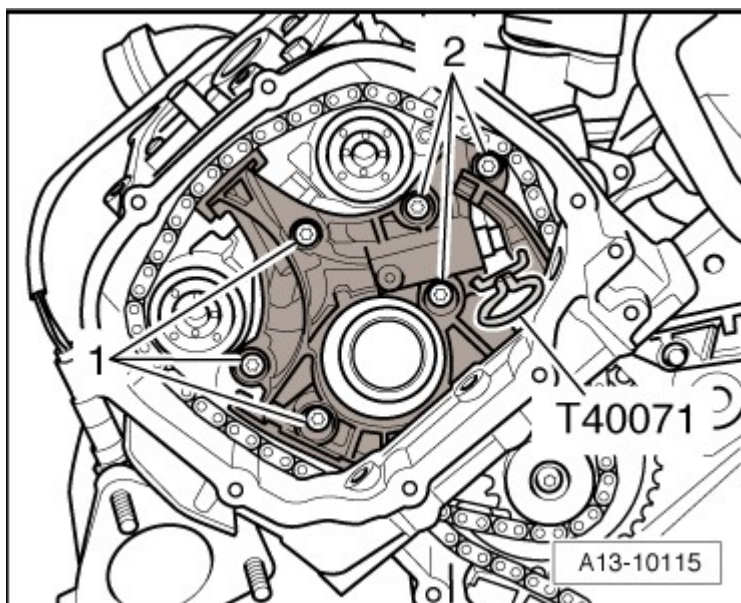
Identifying Bolts For Left Chain Tensioner And Left Camshaft Timing Chain
